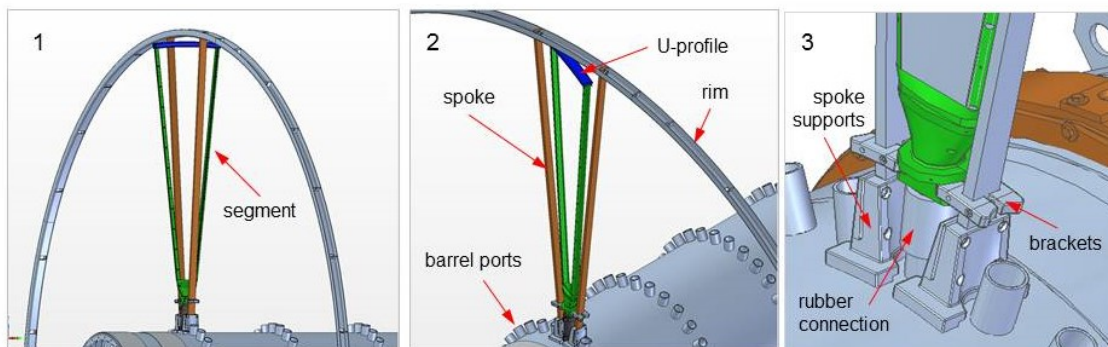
Spoke wheel construction and mounting of a segment (1: plug in of segment to barrel ports, 2: turning of segment through 90°, 3: segment in end position)
